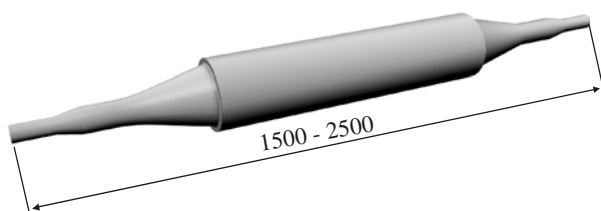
Sketch of a roller to facilitate transport of sheets /plates in the chamber of a batch furnace according to a folder supplied by POSE-Marre Company [5]
